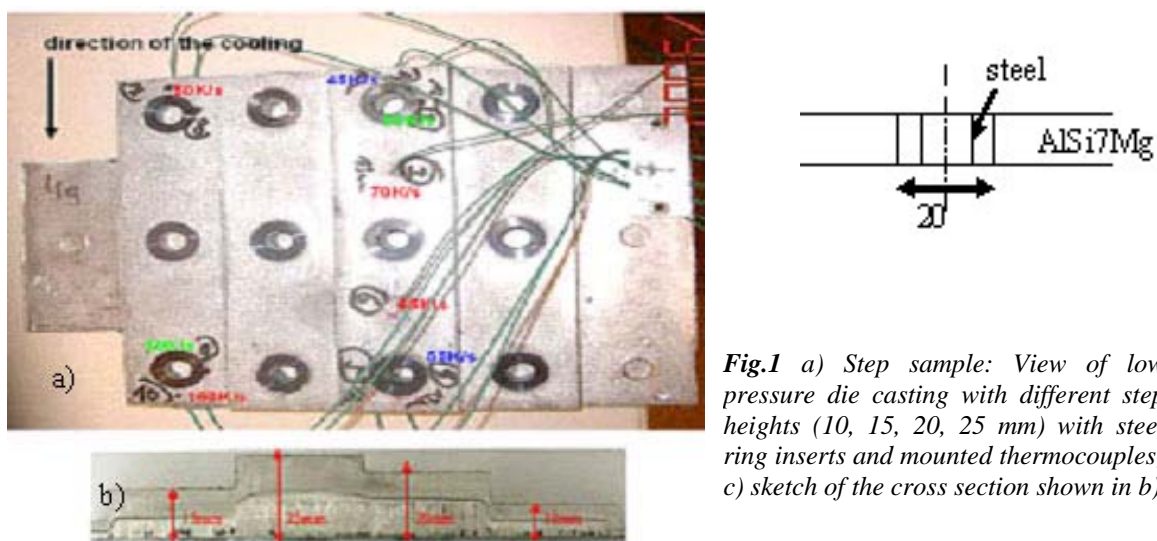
a) Step sample: View of low pressure die casting with different step heights (10, 15, 20, 25 mm) with steel ring inserts and mounted thermocouples; c) sketch of the cross section shown in b)
